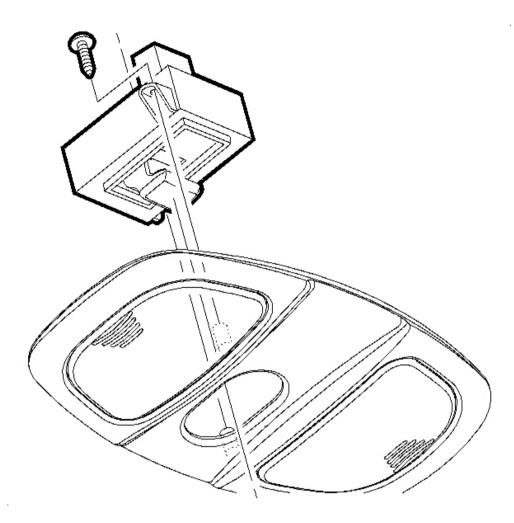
Removing/Installing Sunroof Switch With Fasteners Courtesy of GENERAL MOTORS CORP.
